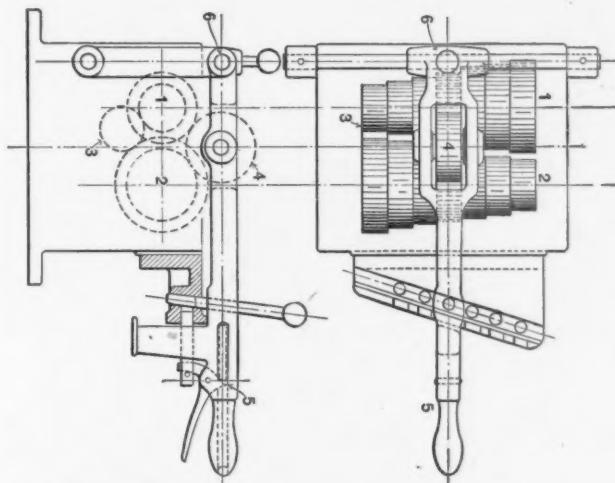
DETAILS OF THE MAIN DRIVE VARIABLE-SPEED MECHANISM USED UPON THE NEW DESIGN OF DRESES RADIAL DRILL.
